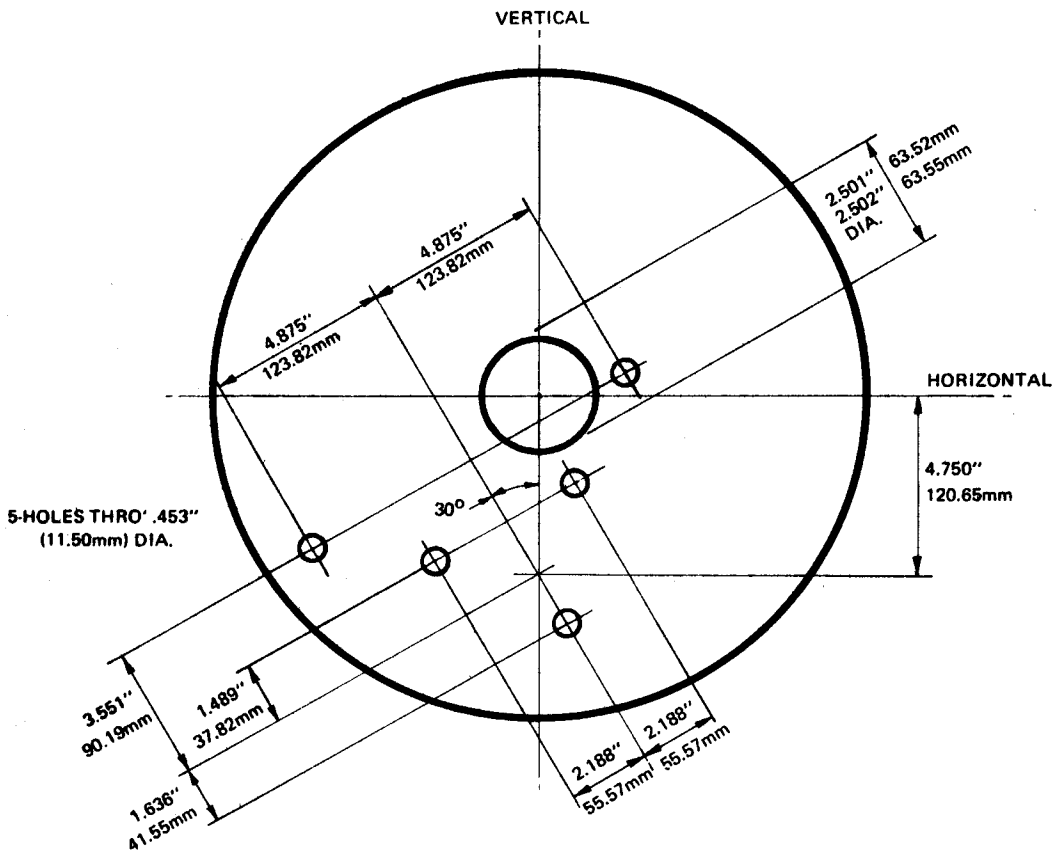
Adaptor Flange drilling details (Gearbox - adaptor)
